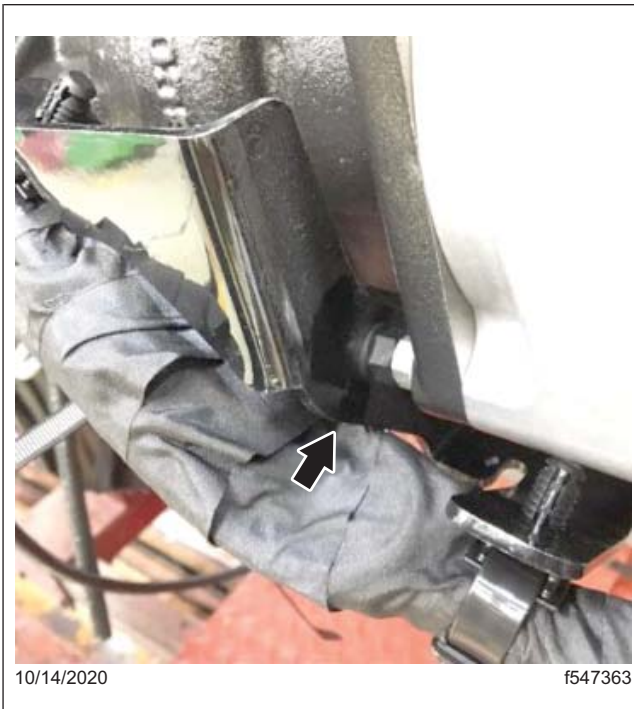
, Current Air Compressor Mounted Bracket Showing Area of Possible Harness Rub
